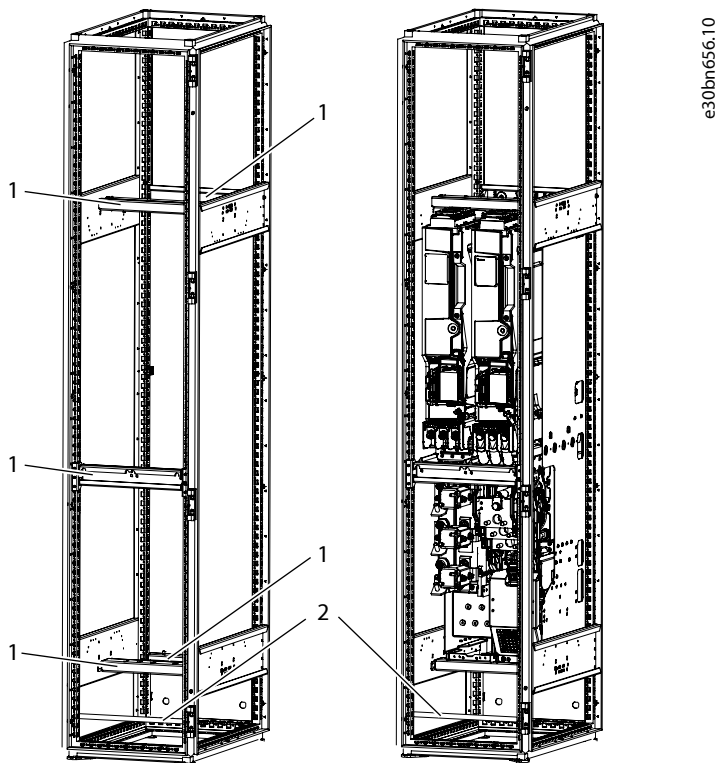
The Mounting Brackets, PE Busbars, and the Installation of System Modules with the Integration Unit into the Cabinet
